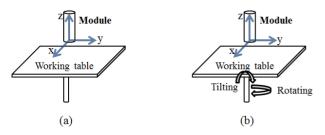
Direct 3D metal printing; (a) 3-axis (b) 5-axis
